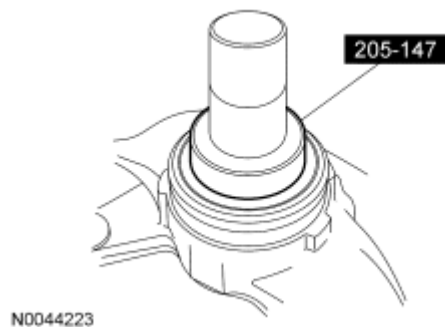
Pressing Wheel Bearing Into Wheel Knuckle Using Special Tool (205-147)
